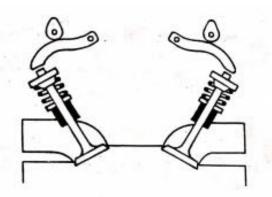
Double overhead camshaft-operated mechanism with separate rocker arms.
